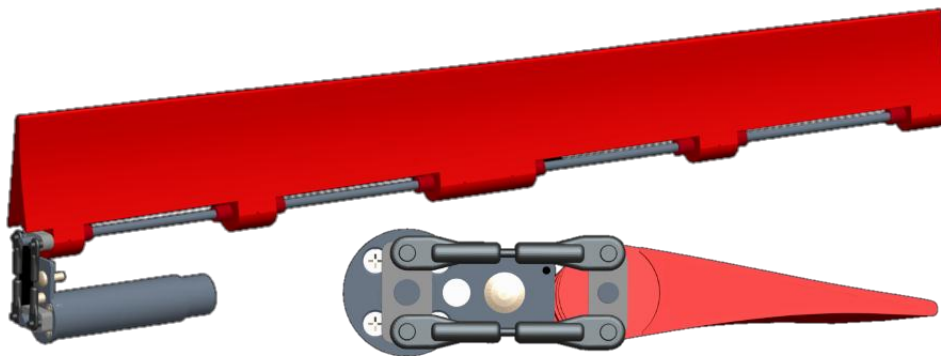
Detailed view of dual push/pull rod mechanism and motor (base piece is hidden).
